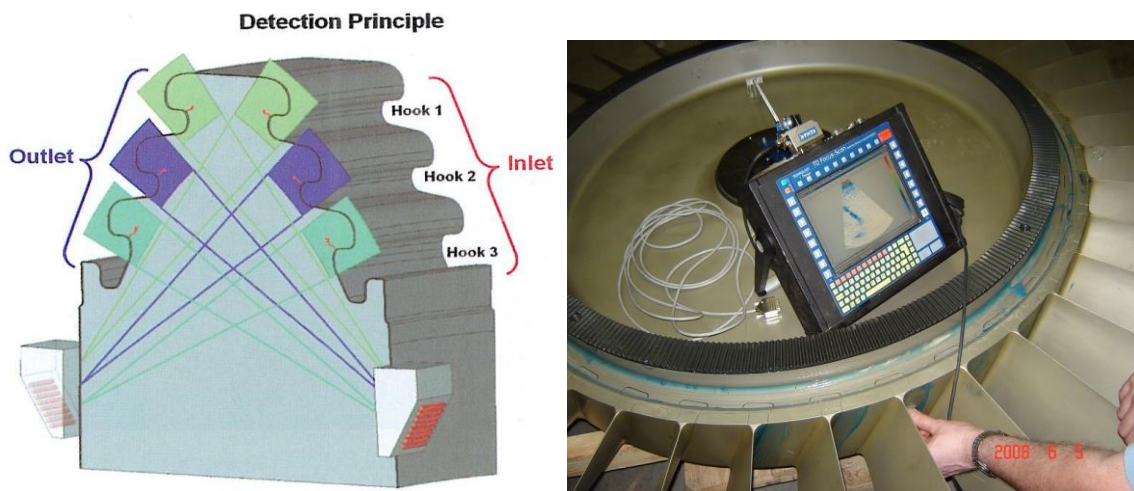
Left: blade root with cracks that can be investigated using UT-Phased Array; right: inspection of gas turbine using UT-Phased Array.
